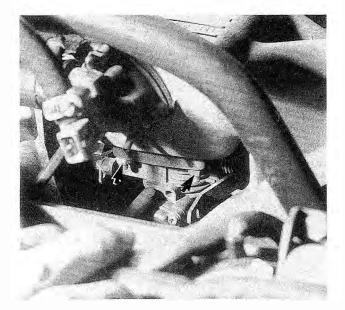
Front throttle housing mounting nuts (arrows). Rear mounting nuts not visible.
